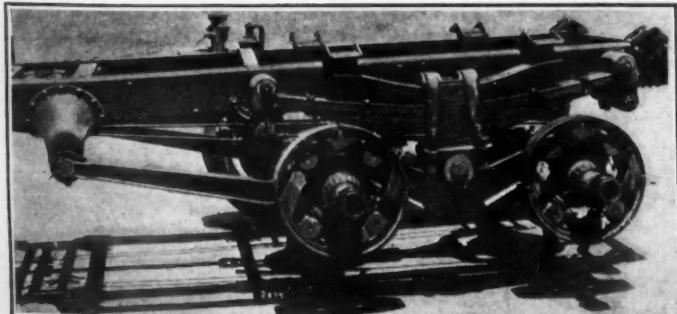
REAR END OF SIX-WHEEL-TRUCK CONSTRUCTION
